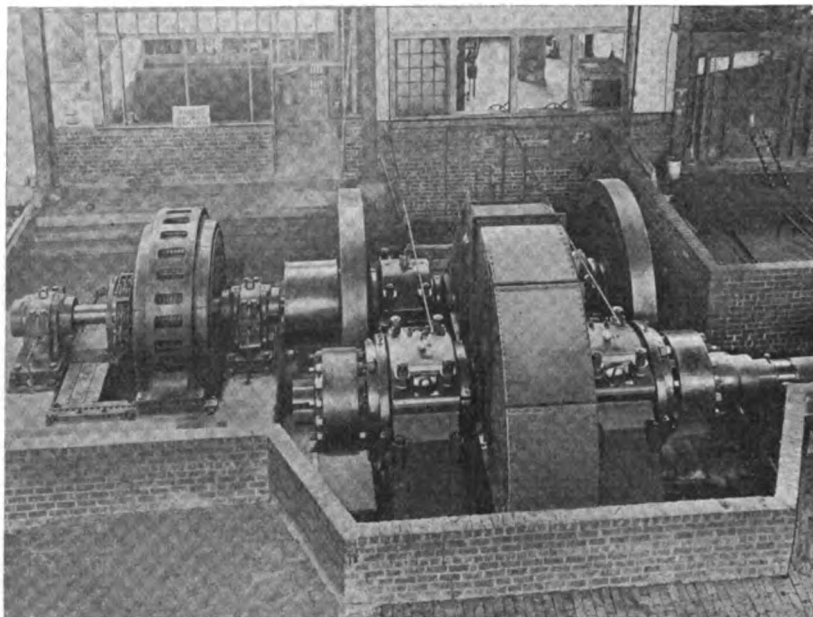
1,500 hp alternating-current motor connected to sheet mill by gear drive at Canton Sheet Steel Company. Note location and arrangement of flywheel in pinion shaft.
